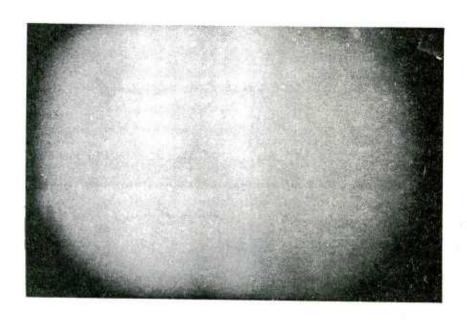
RADIOGRAPHY OF COMPLEX CRACK NETWORK IN WELD A/PT2
